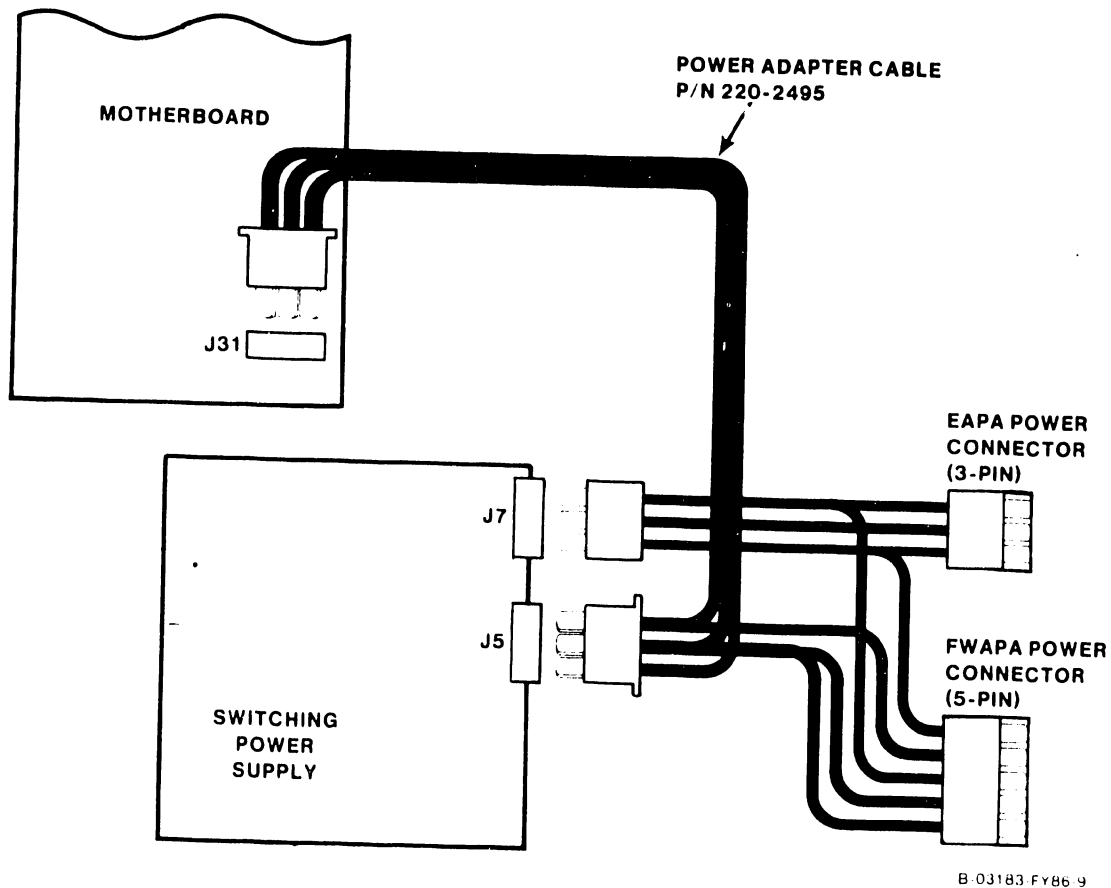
A. Power Supply Cable Adapter Assembly Connections
